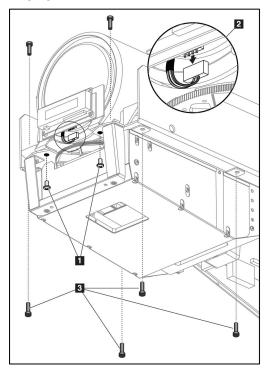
Lower Cover Mounting Bracket Removal and Display Connection
